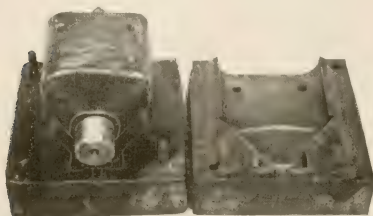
HOT WATER BOTTLE FUNNEL SHAPING MOLD AND CORE.
